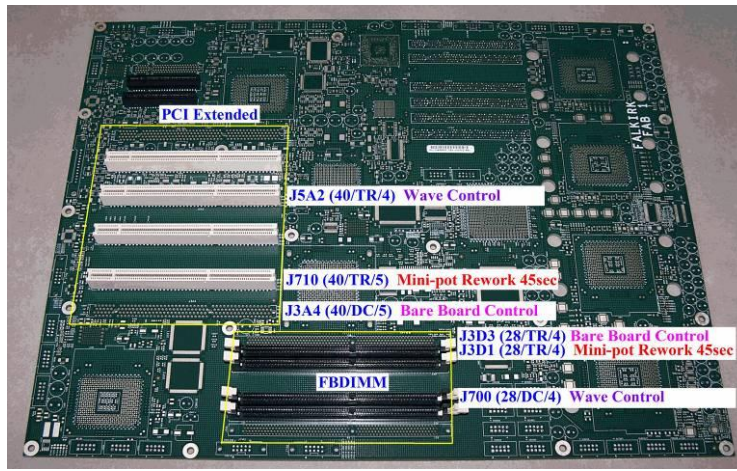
Server Test Board with Connector Cross-section Locations Labeled
